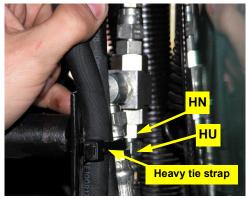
Connecting the LS port and the shuttle and securing the shuttle assembly
